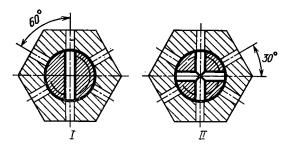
Nut rotation angle for locking with cotter pins I—with a single pin hole in bolt; II—with two mutually perpendicular holes
